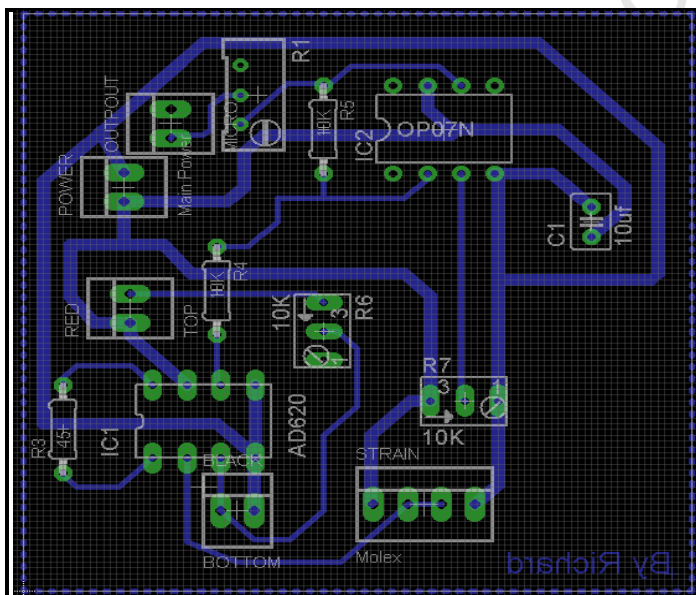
Showing the Eagle CAD final circuit board arrangement design
